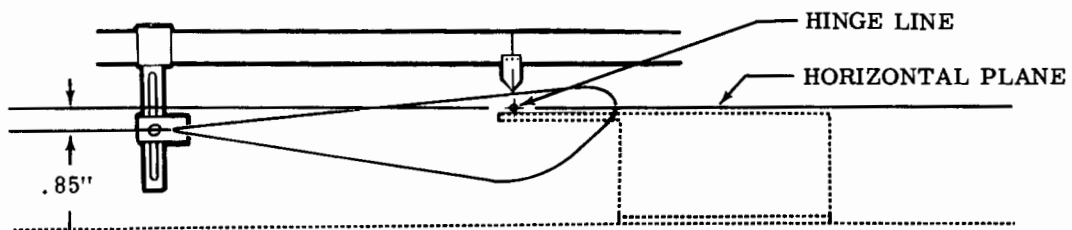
Control Surface Balancing (Sheet 2 of 3)
